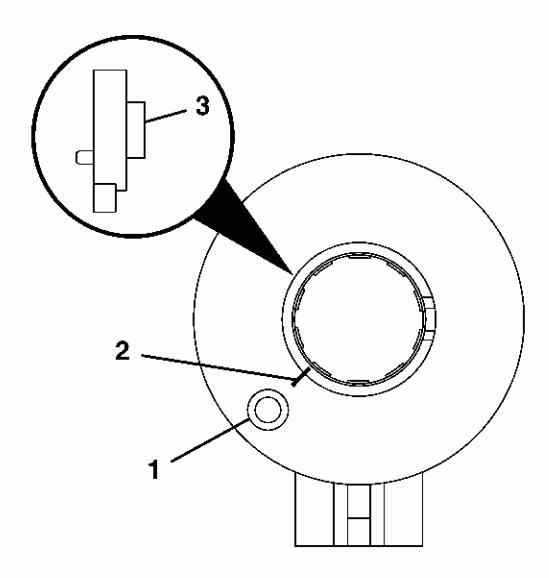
Identifying Steering Wheel Position Sensor Alignment Mark Courtesy of GENERAL MOTORS CORP.
